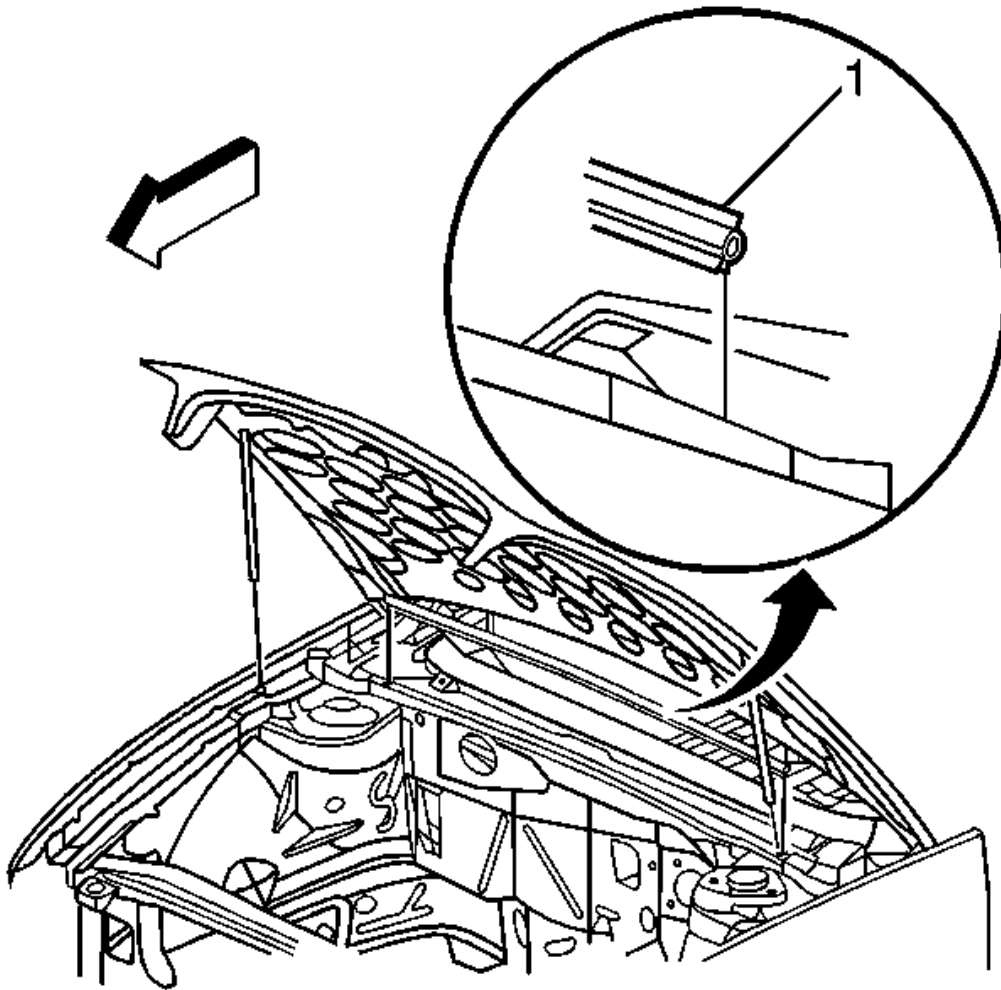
Removing Hood Side Rear Seal From Pinchweld Flange
